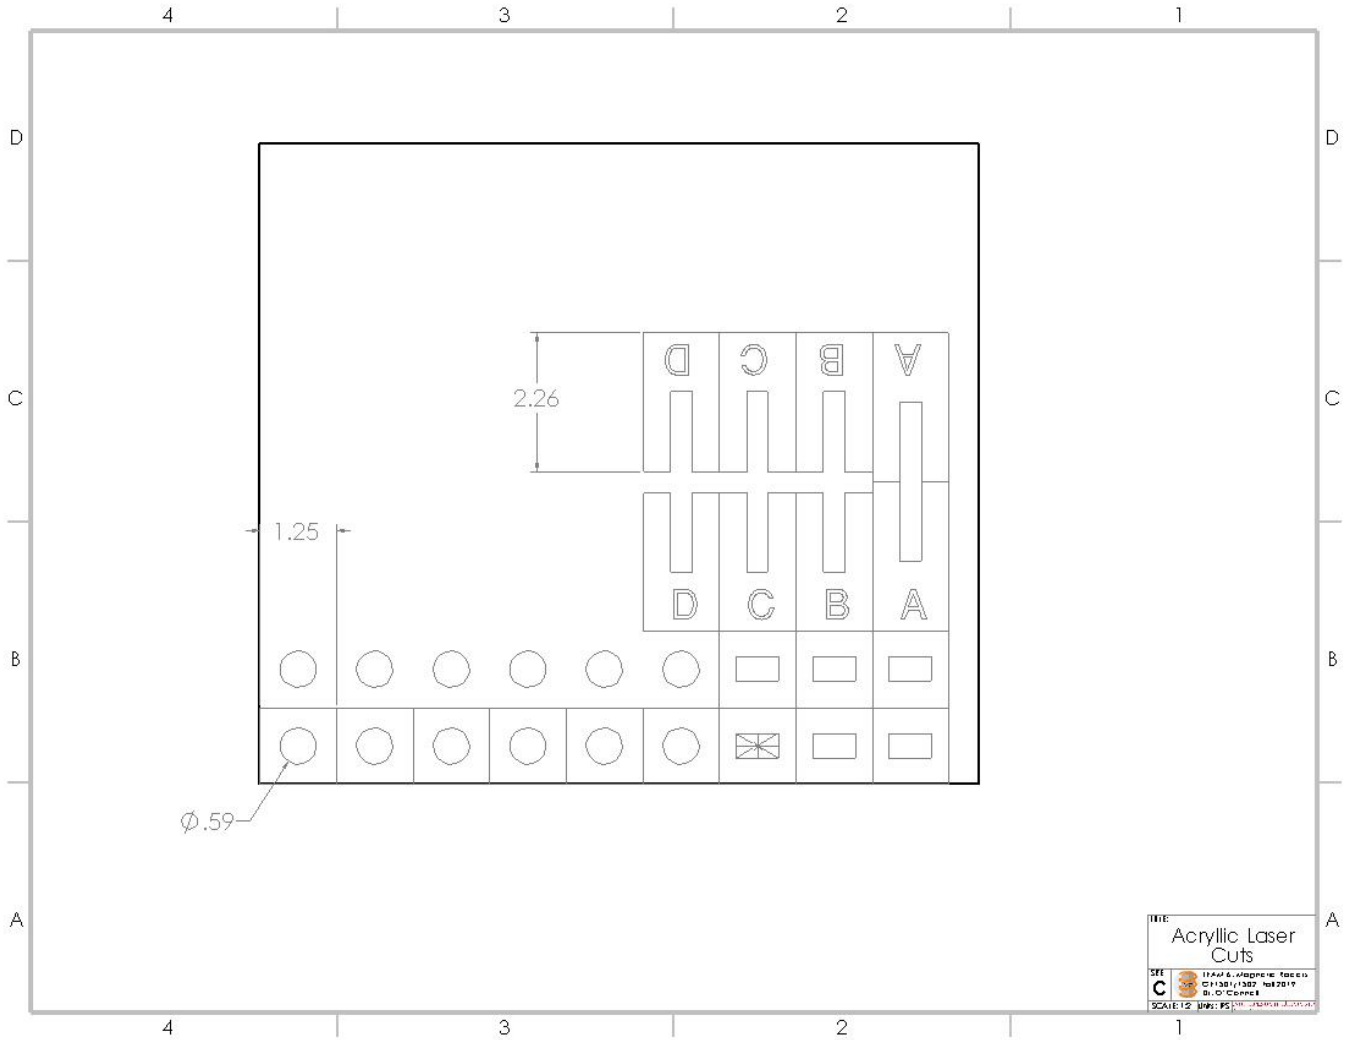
Solidworks drawing of laser cut acrylic pieces: Circular spacers and square caps with circles for the electromagnets. Square caps with rectangles for Coil C (rectangular core). Acrylic “cases”, with labels for the tops of the magnets.
